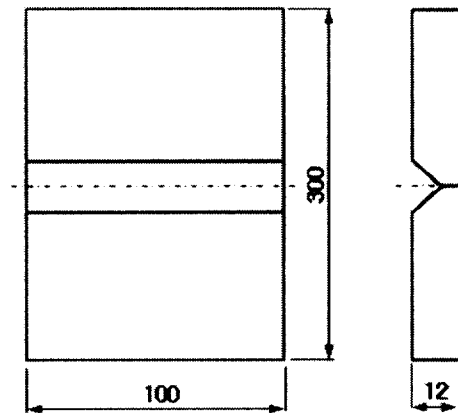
Specimen of Y-groove butt joint for plasma-MAG tandem welding
